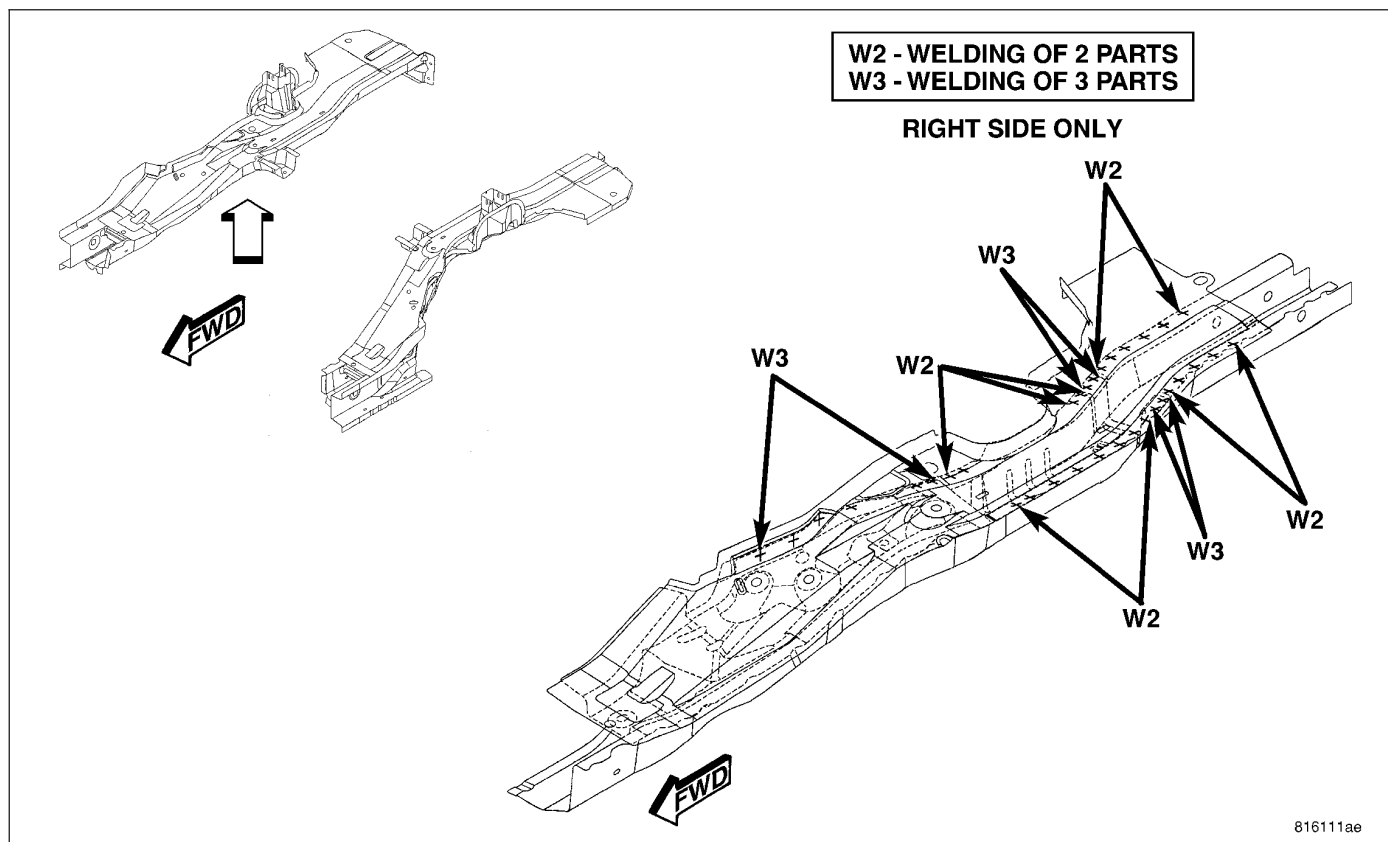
SIDEMEMBER ASSEMBLY (8 OF 17)
